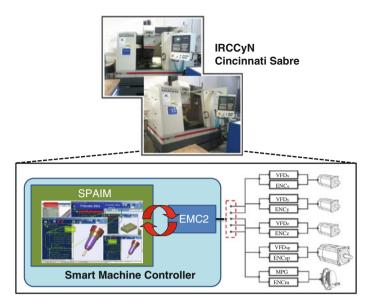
IRCCyN's Sabre machine-tool equipped with the Open-NC controller
